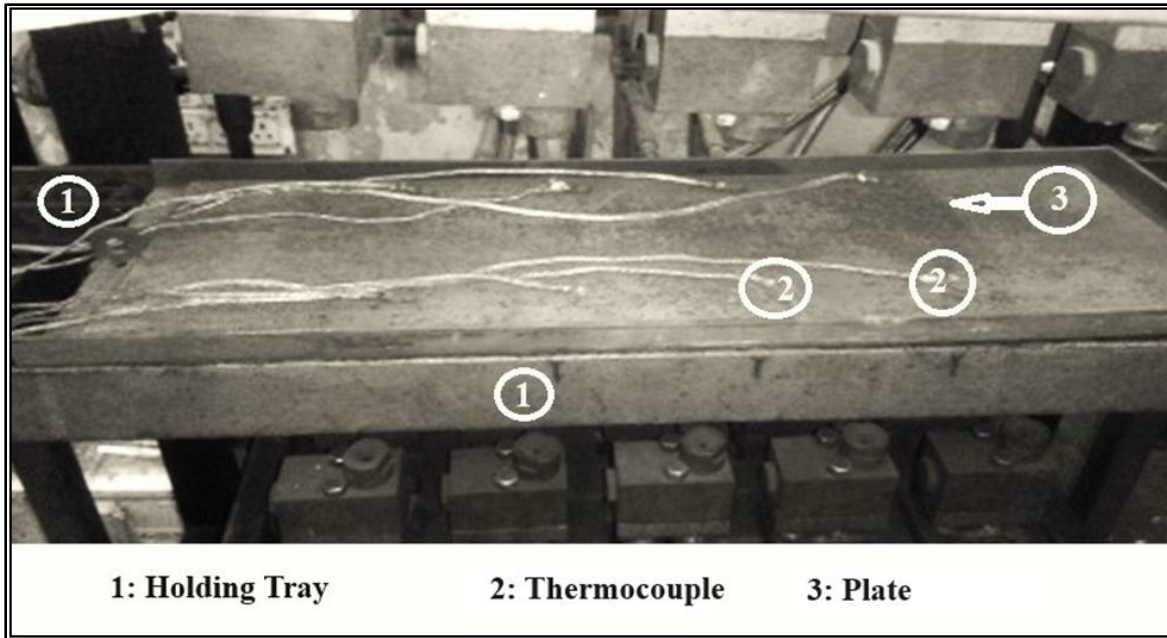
Holding Tray and Plate with Thermocouple
